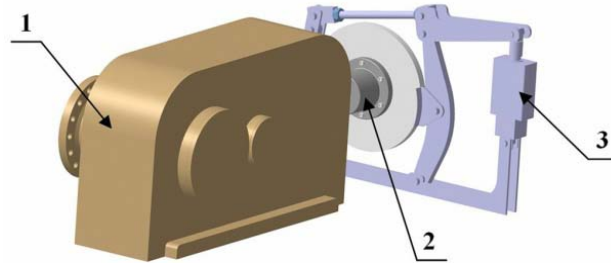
Belt conveyor drive components: 1. gearbox, 2. coupling, 3. drum brake
